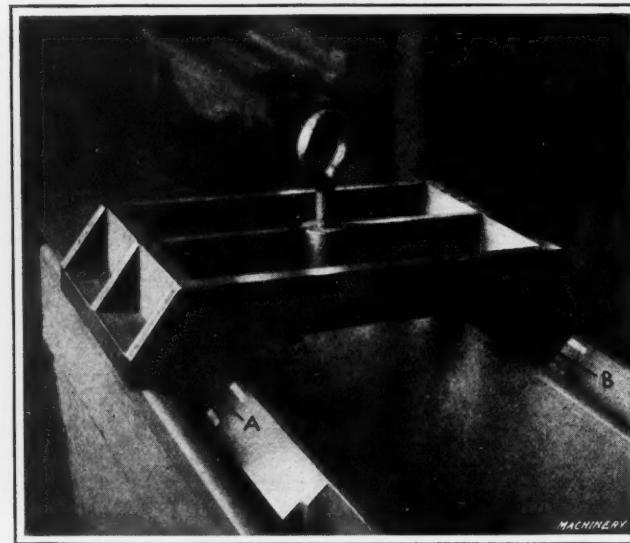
Close-up View of Gage and Tissue-paper Feelers for testing the Accuracy of Planer Bed Bearings shown in Fig. 1
